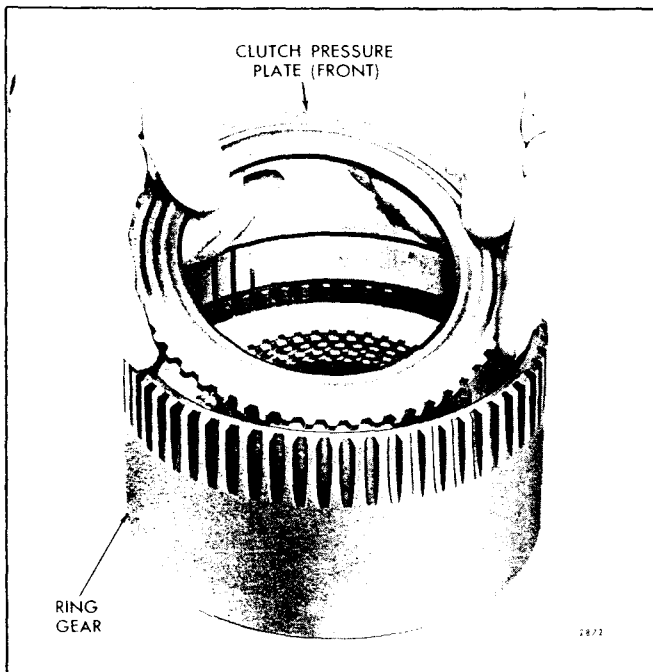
Installing Front (Forward) Clutch Pressure Plate in Ring Gear
